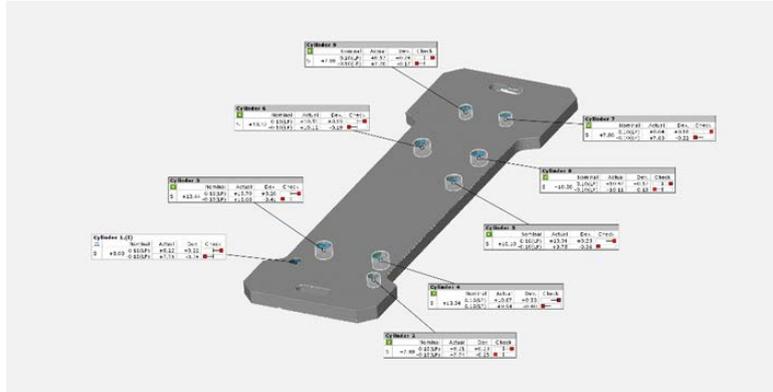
GOM Inspect dimensional and GD&T control
